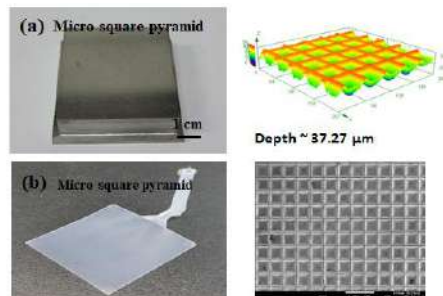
Fabricated mold insert and replicated PFA contact layer of TENG
